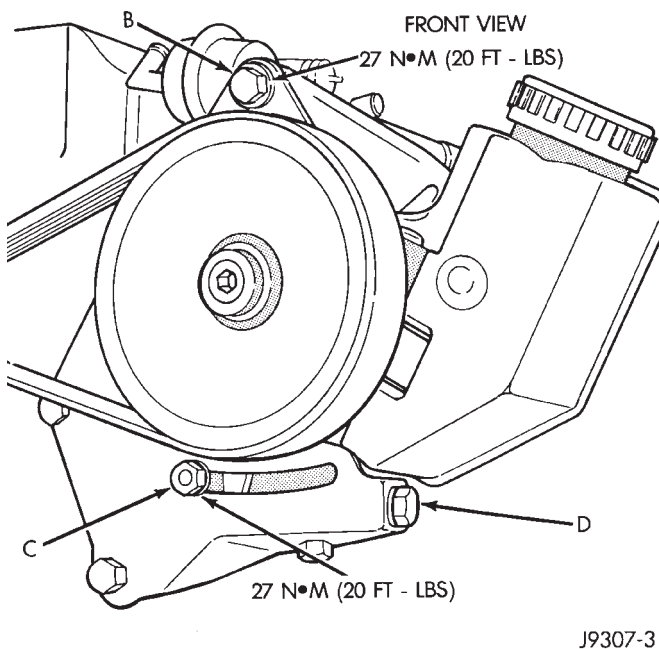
P.S. Pump Front Mounting Bolt/Locknut—Typical
